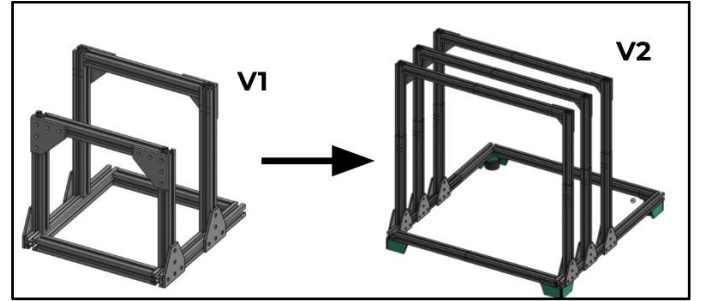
Onshape CAD of Frame Version 1 and Version 2
